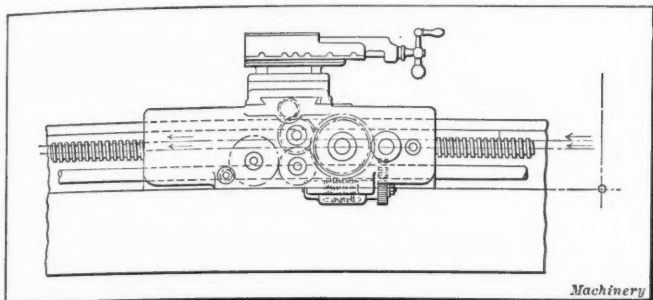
Schaerer Bed Construction with Saddle Bearings on Side of Bed
